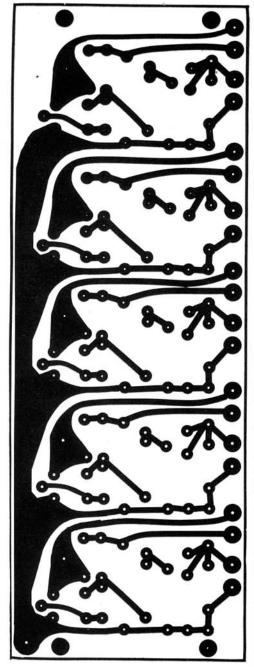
Actual-size illustration of printed circuit board. For hole drill sizes, refer to Fig. 4.
